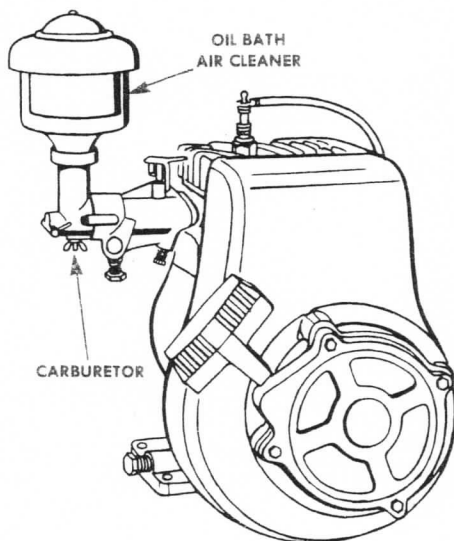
An oil bath air cleaner mounted on top of a carburetor. (Clinton Engines Corp.)
